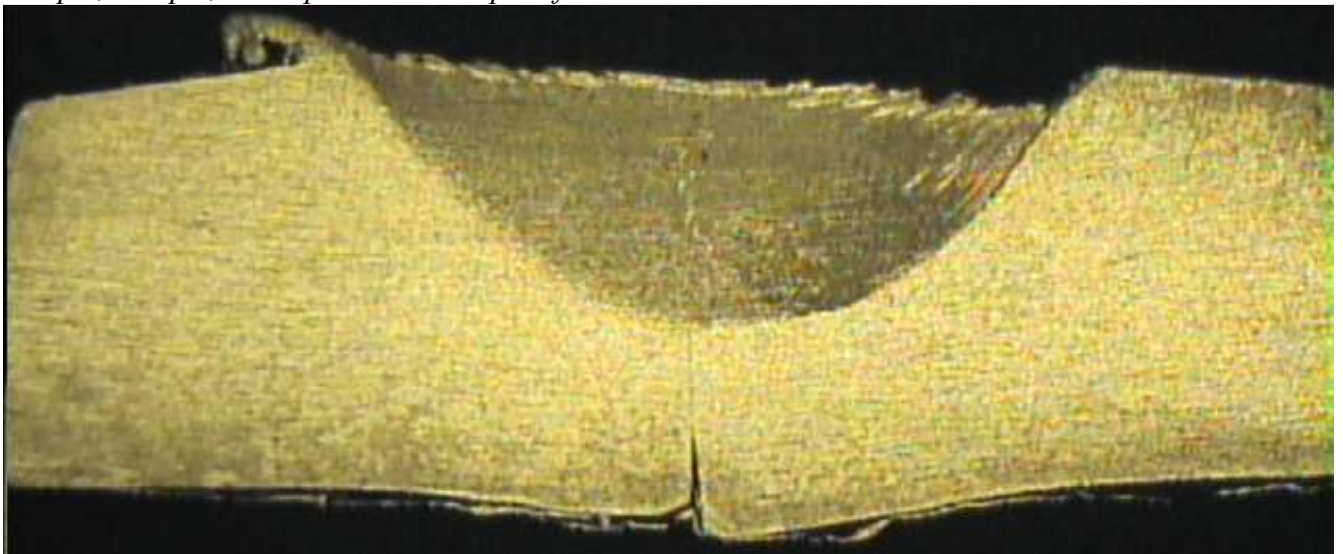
Macrosection view of an unsupported, butt configuration weld made with a 100° conical tool (0.025" diameter snub-nose and 0.015" cupped nose recess) at 1000rpm, 10.4ipm, and a penetration depth of 0.11". At this depth, unsupported welds made with the conical tool begin to split and protrude at the root for some of the tested weld parameters. The initiation of protrusion and splitting in the weld root at 0.110" was deemed undesirable by the authors for the suggested applications. The experimental matrix was therefore performed at 0.100" where this did not occur. It should be noted however that the strength of the unsupported welds increased with depth beyond the experimental matrix depth of 0.100".
